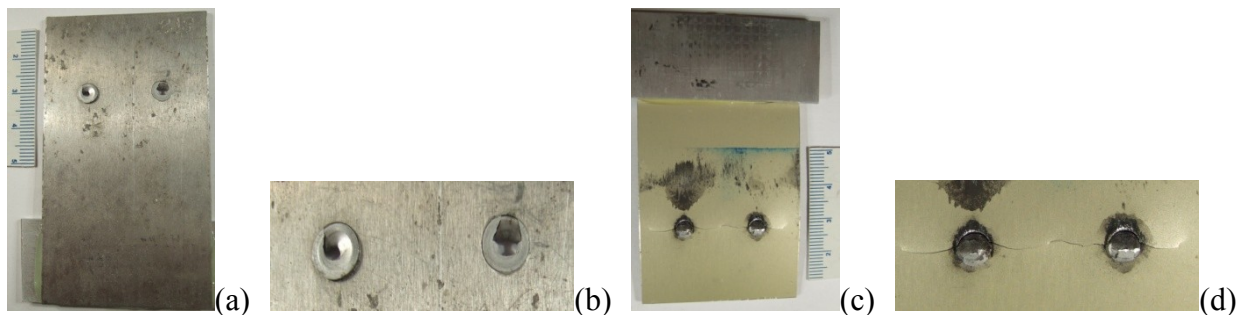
(a) Outer face of countersunk Al-alloy sheet of the Al-Gl joint (A); (b) Detailed view; (c) Inner face of straight-bottom hole FML sheet; (d) Detailed view.
